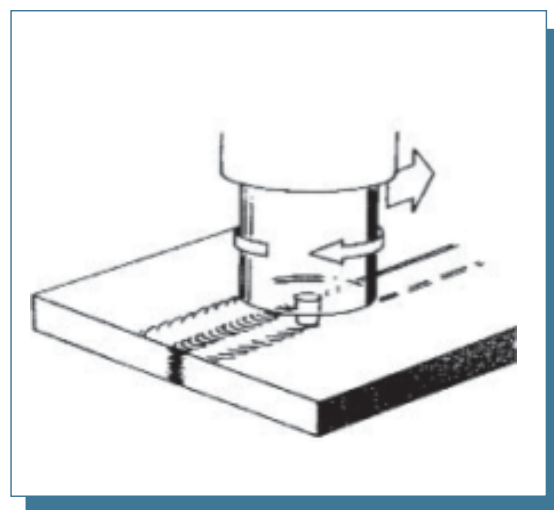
Schematic representation of the FSW process for butt joint welding. The FSW tool is rotated and traversed along the joint to produce the weld [13].
